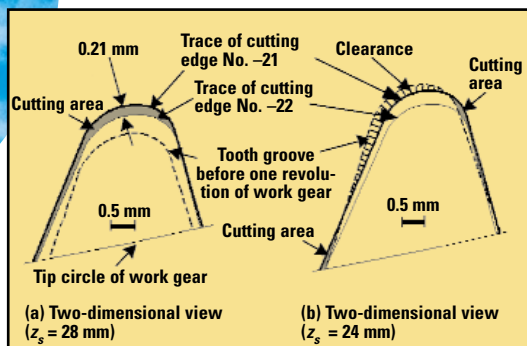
Expression of cutting area and clearance between cutting edge of hob tooth No. -21 and the work gear's tooth flank.
